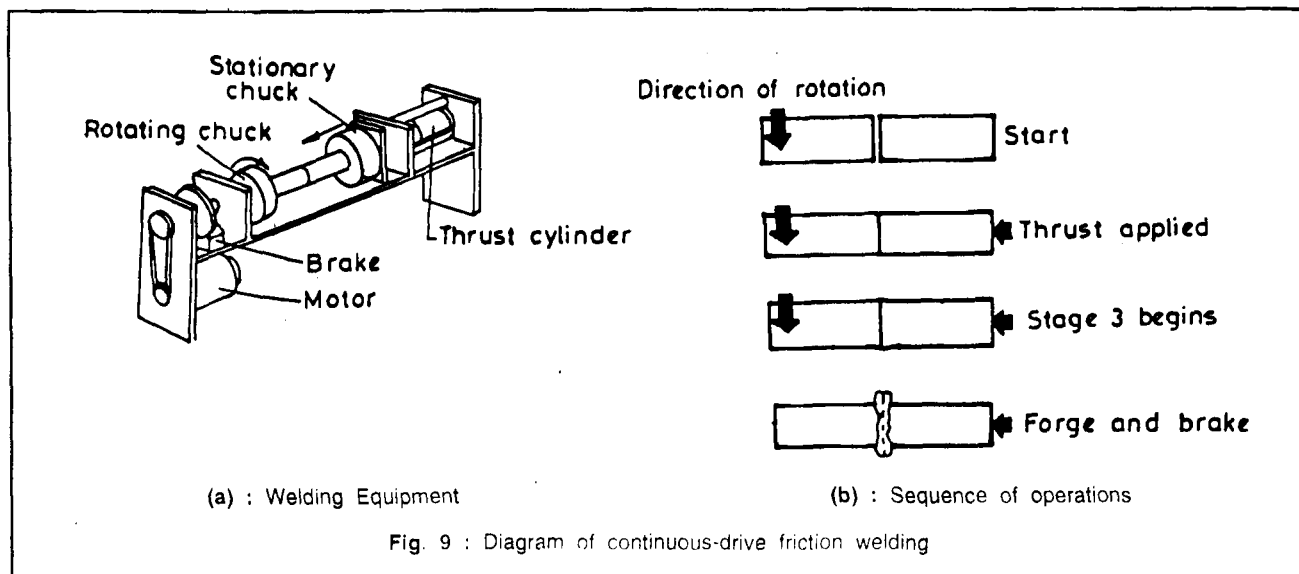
Diagram of continuous-drive friction welding
